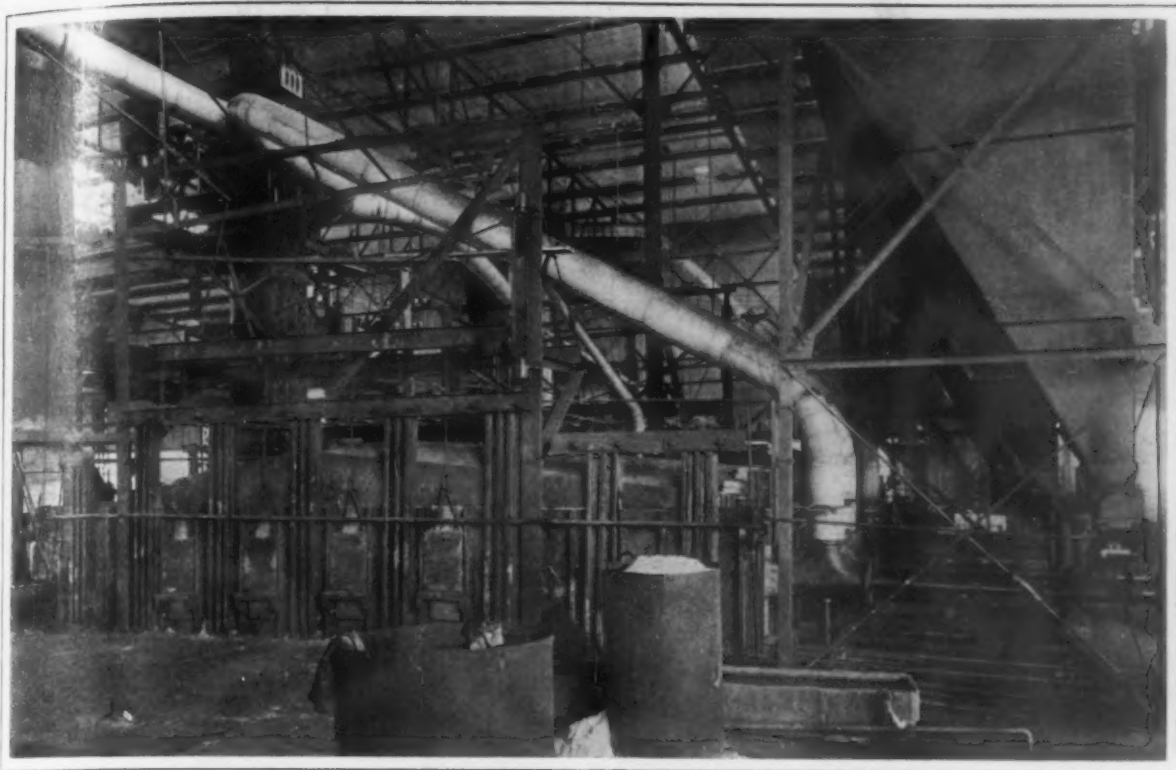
A Side View of a 4-Door Furnace for the 9-In. Mill Showing Coal Hoppers, Foot Valves, the Burners and Secondary Air Piping from the Overhead Blower
